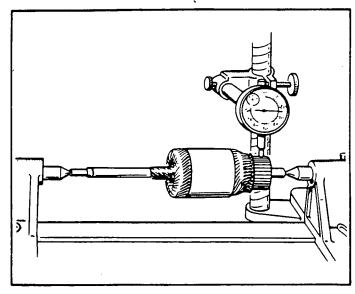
CHECKING COMMUTATOR RUNOUT
